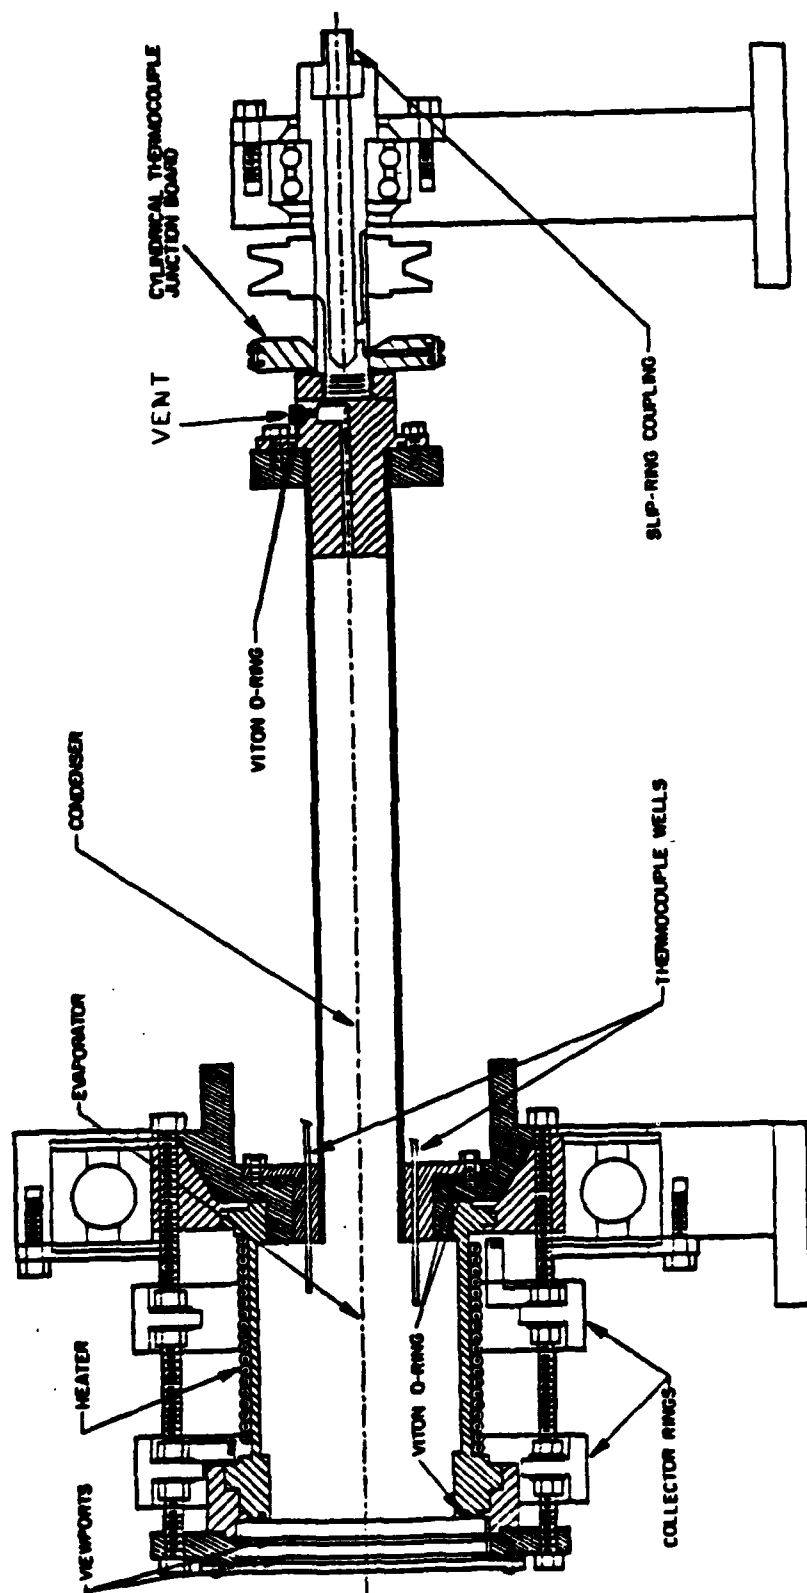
Cross-Sectional Drawing of the Rotating Heat Pipe
